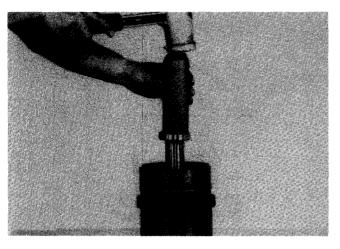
Install clutch gear inner bearing. NOTE: The inner bearing does not have a bearing shield.
